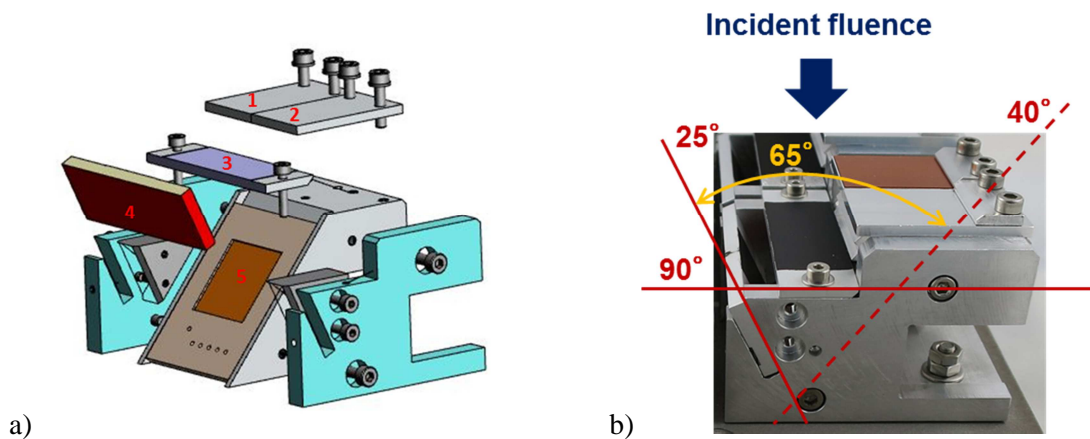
a. geometry design (exploded view). b. assembled geometry with orientation references.
